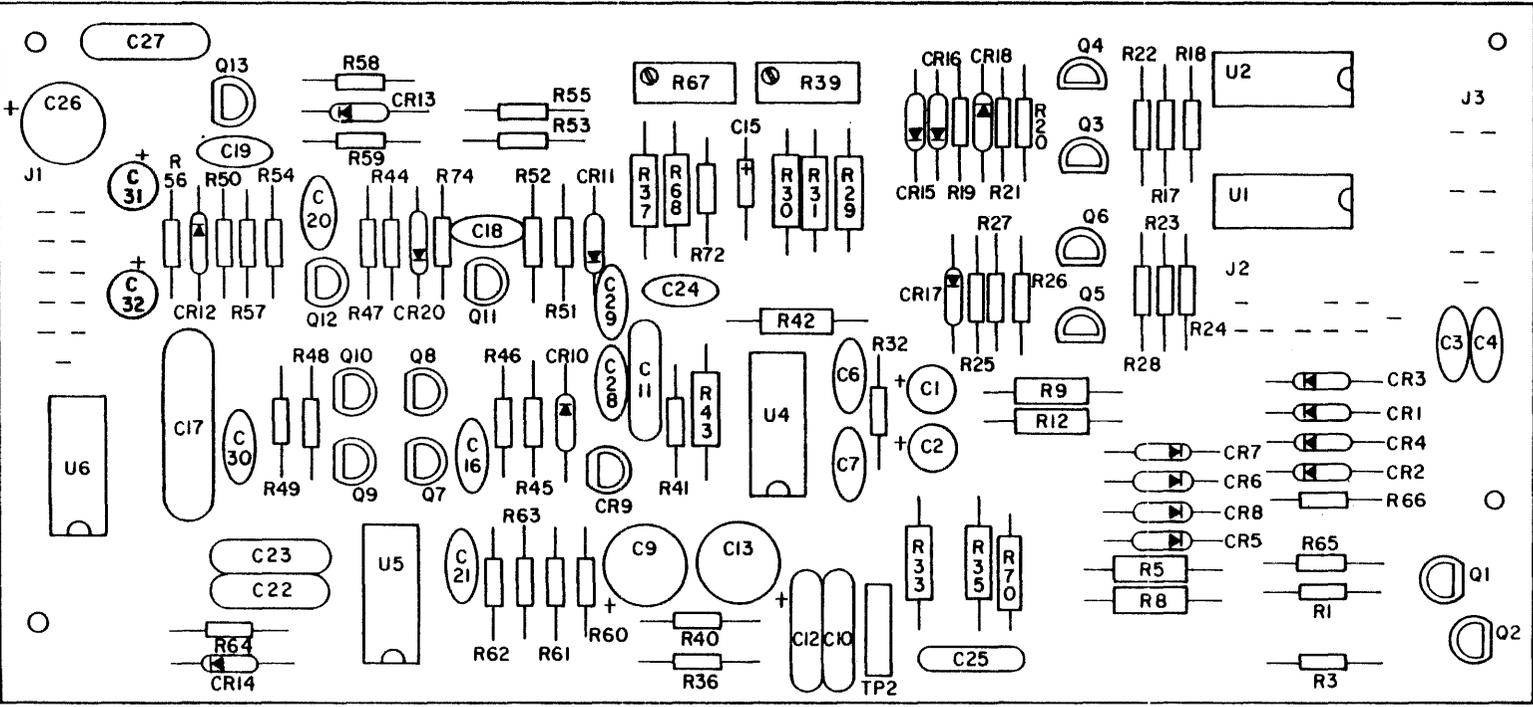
5 IPS READ/WRITE ASSEMBLY
